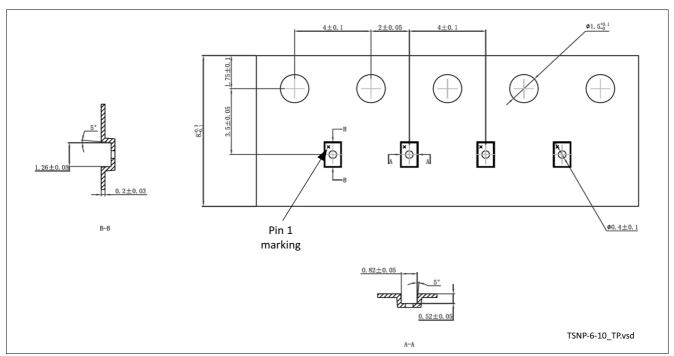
Tape & Reel Dimensions TSNP-6-10 (reel diameter 180 mm, pieces/reel 12000)
